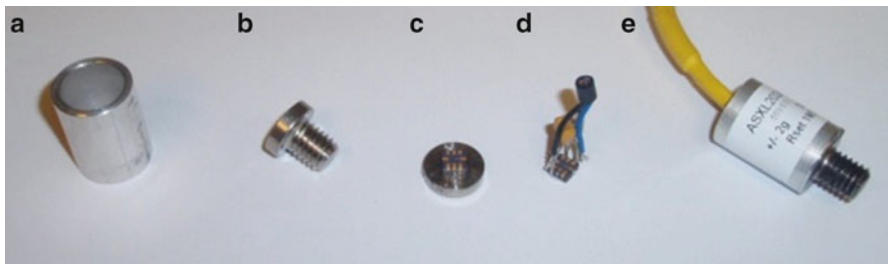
MEMS packaged sensor components: (a) sensor outer casing (mild steel), (b) threaded mounting bottom plate, (c) flat mounting bottom plate with MEMS affixed, (d) MEMS with components attached, (e) Packaged MEMS sensor
